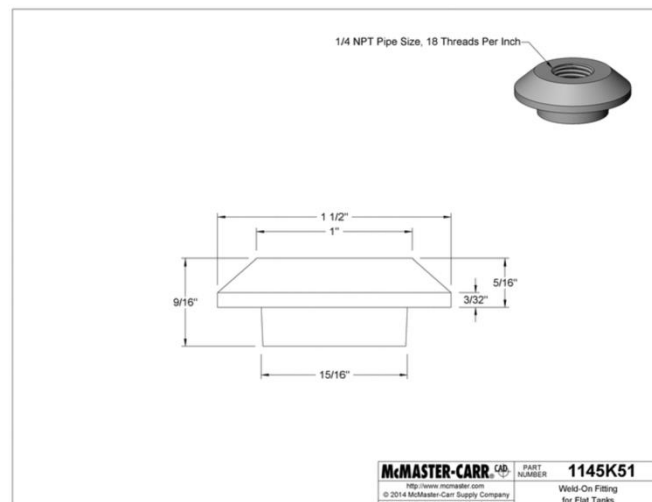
1/4" NPT aluminum weld-on fitting.
